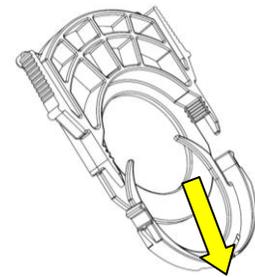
Remove the locking ring by pulling it out of the holder. Replace and press in until the click to lock.
